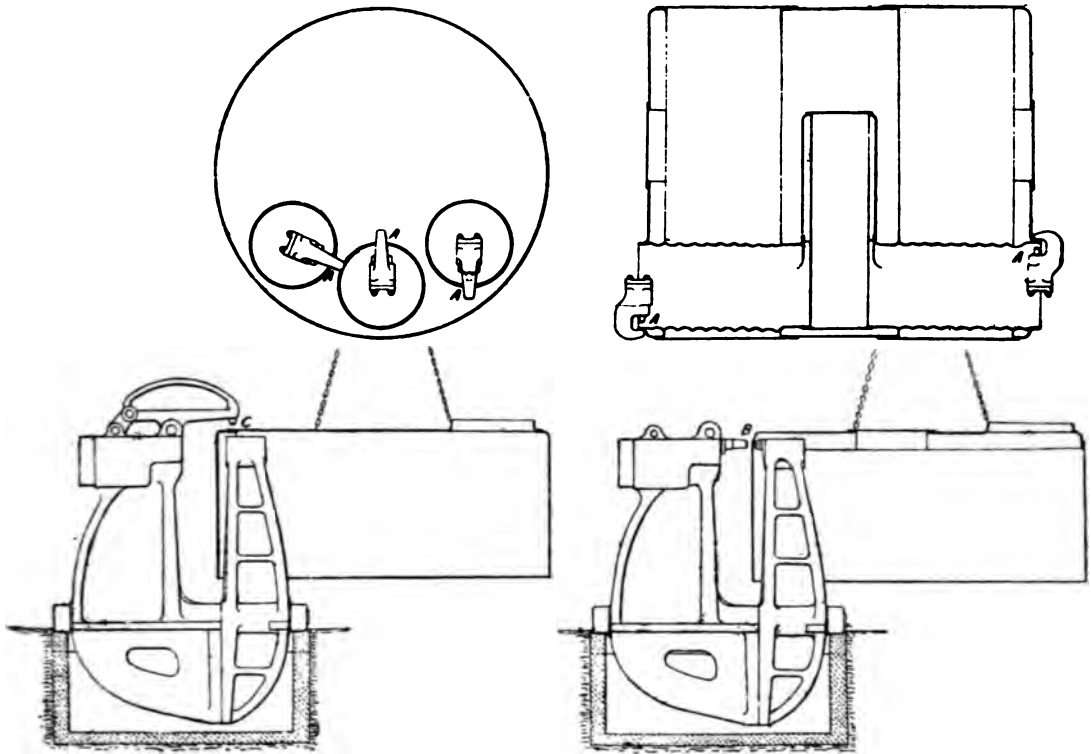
Hydraulic Riveting Applied to Marine Boilers.
